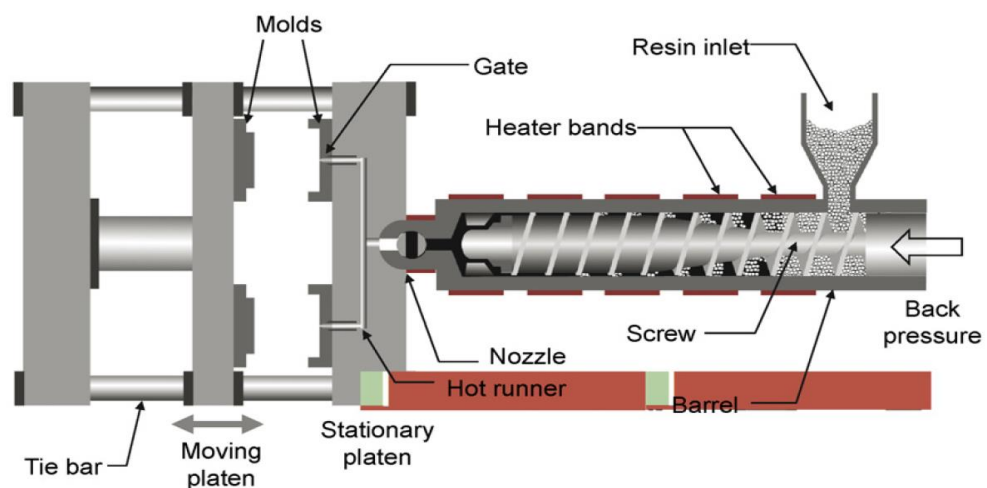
Major components of Injection molding machine attached to screw extruder [23]
